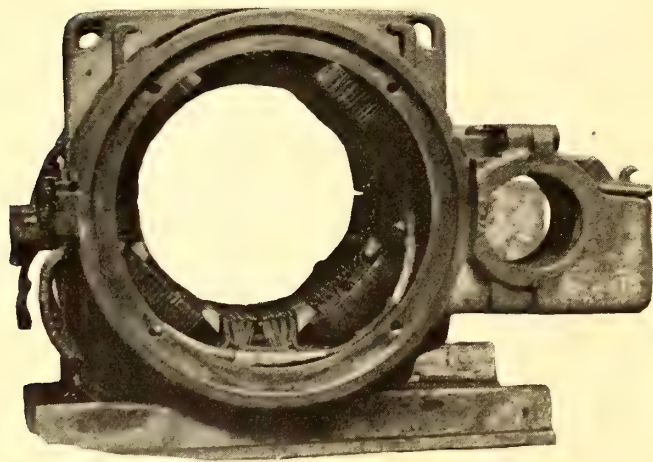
STATOR OF SINGLE-PHASE MOTOR
